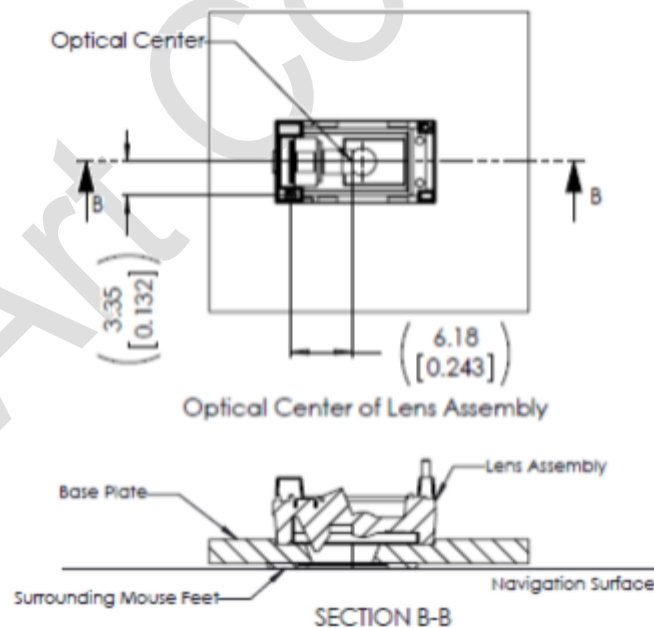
Cross Section View of LOAE-LSI1 lens Assembly
